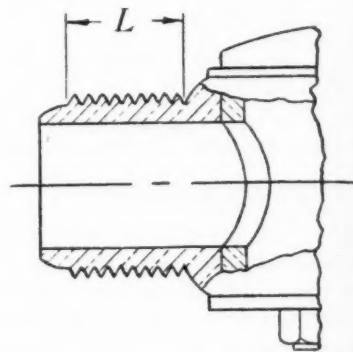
Fitting Thread for Use With Flared Copper Service Tubes, Type K
